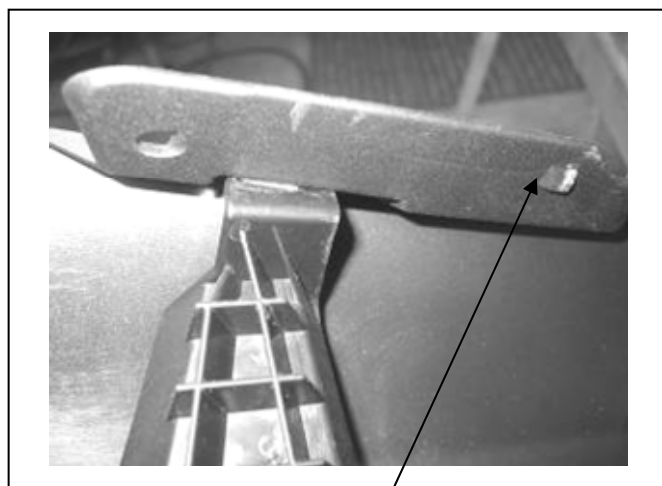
Clip on underside of plastic bumper, shown with bumper removed
